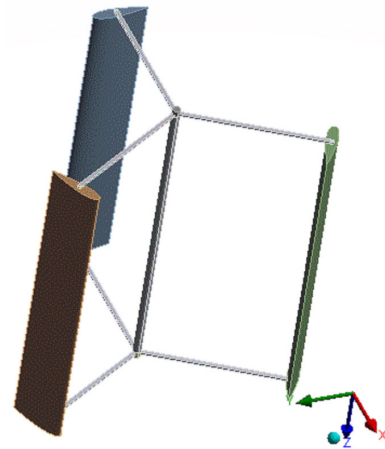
(a) Three Dimensional model of H-type Darrieus turbine.
